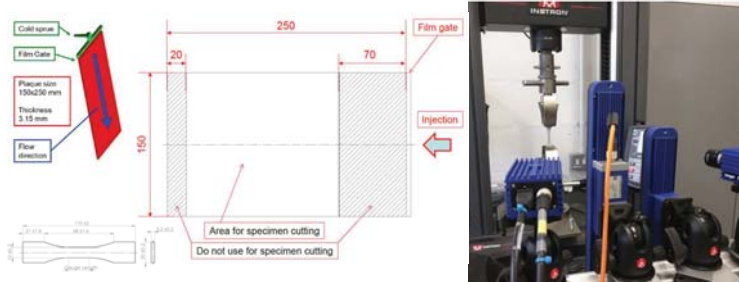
Plaque and specimen dimensions and cutting area on injection moulded plaques manufactured by LyondellBasell Italy. Figure 2. Uniaxial tensile test set-up.
